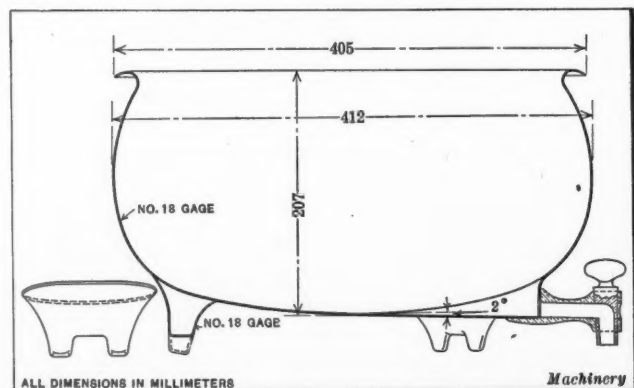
Sectional View of the Seamless Kettle with Legs and Faucet assembled
